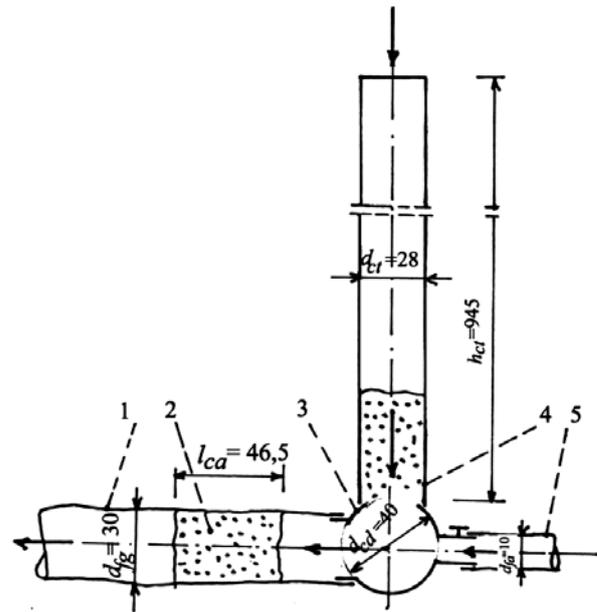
Granules feeding cannular chamber – spherical mixing-dosing chamber and granules+air mixture pressing hose assembly
